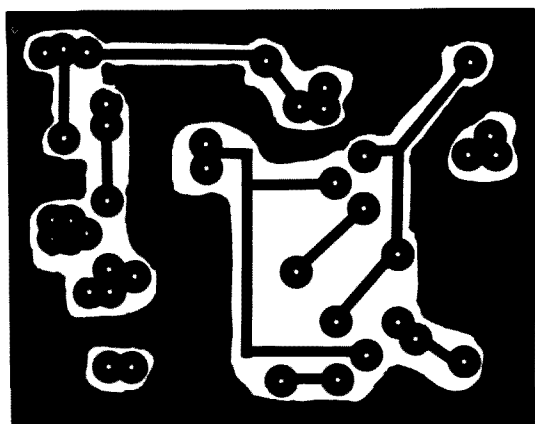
PC board layout, foil side. (Single-sided, fiberglass, copper-clad board.)
